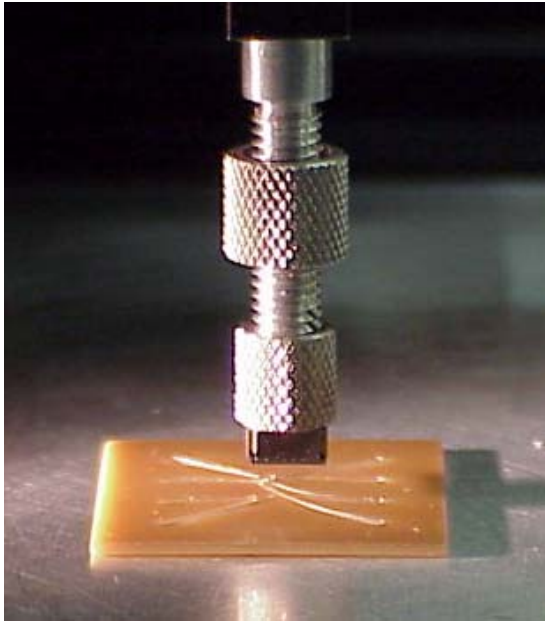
Flip-chip alignment of electro-microfluidic silicon chip using Finetech alignment fixture.
